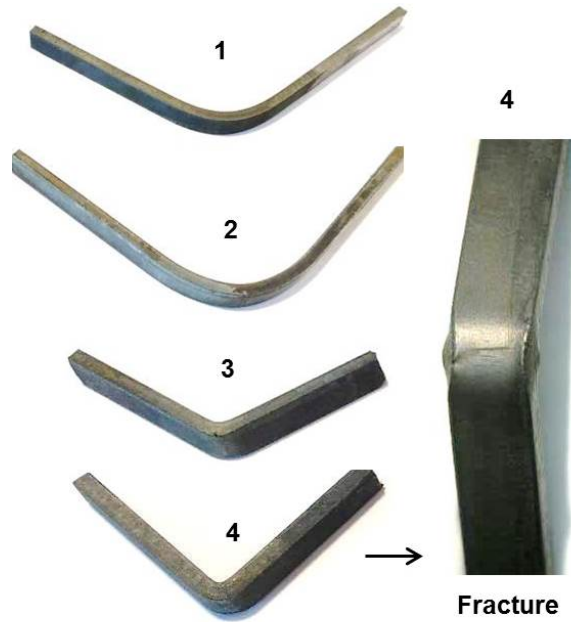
Bend tested Q&P sheet steel samples using a loading pin radius of 15 mm (1 and 2) and 0.6 mm (3 and 4). Fracture was initiated on top of the bend for the fourth sample exposed to the highest loading condition.
